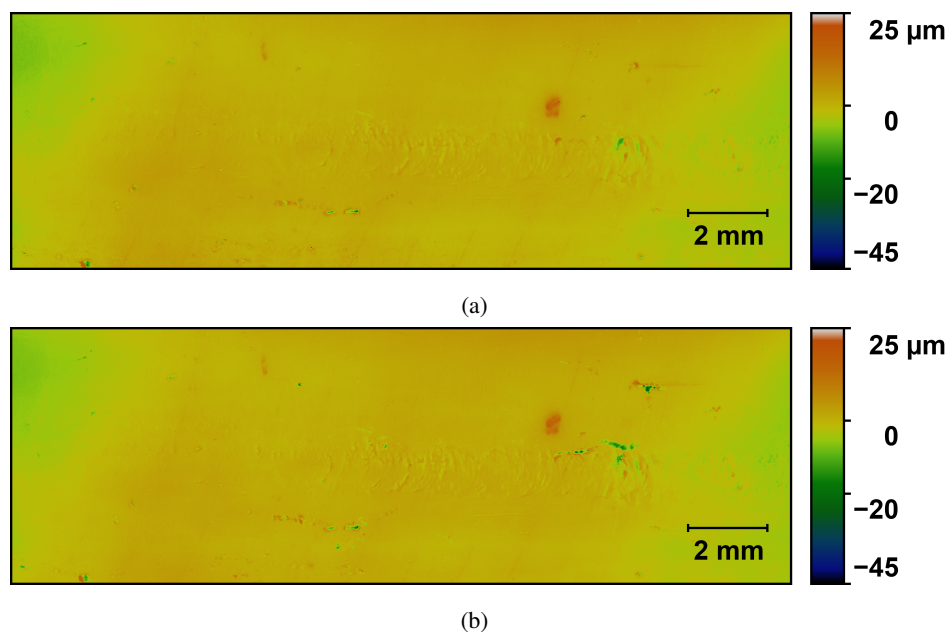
WLI surface maps of the (a) uncorroded and (b) corroded surfaces of the root of the 3.2 mm Alclad specimen. The top of these images is the RS, the bottom of these images is the AS, with the welding tool having travelled from left to right.
